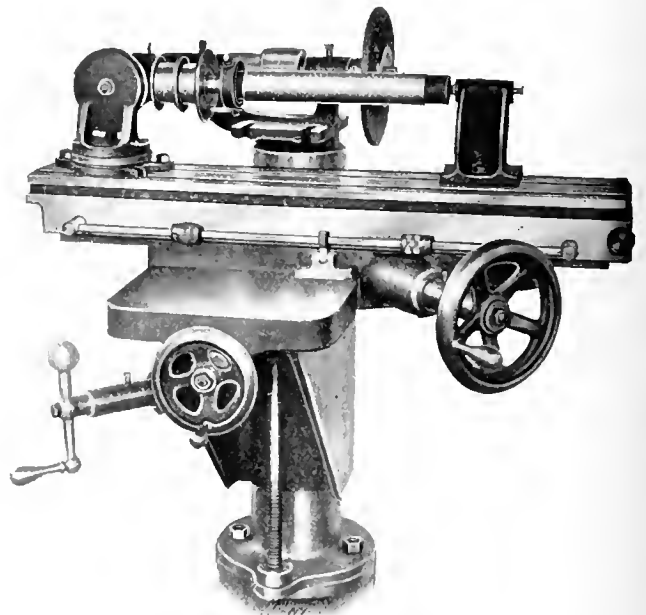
The Machine arranged for Plain Cylindrical Grinding on Dead Centers.
